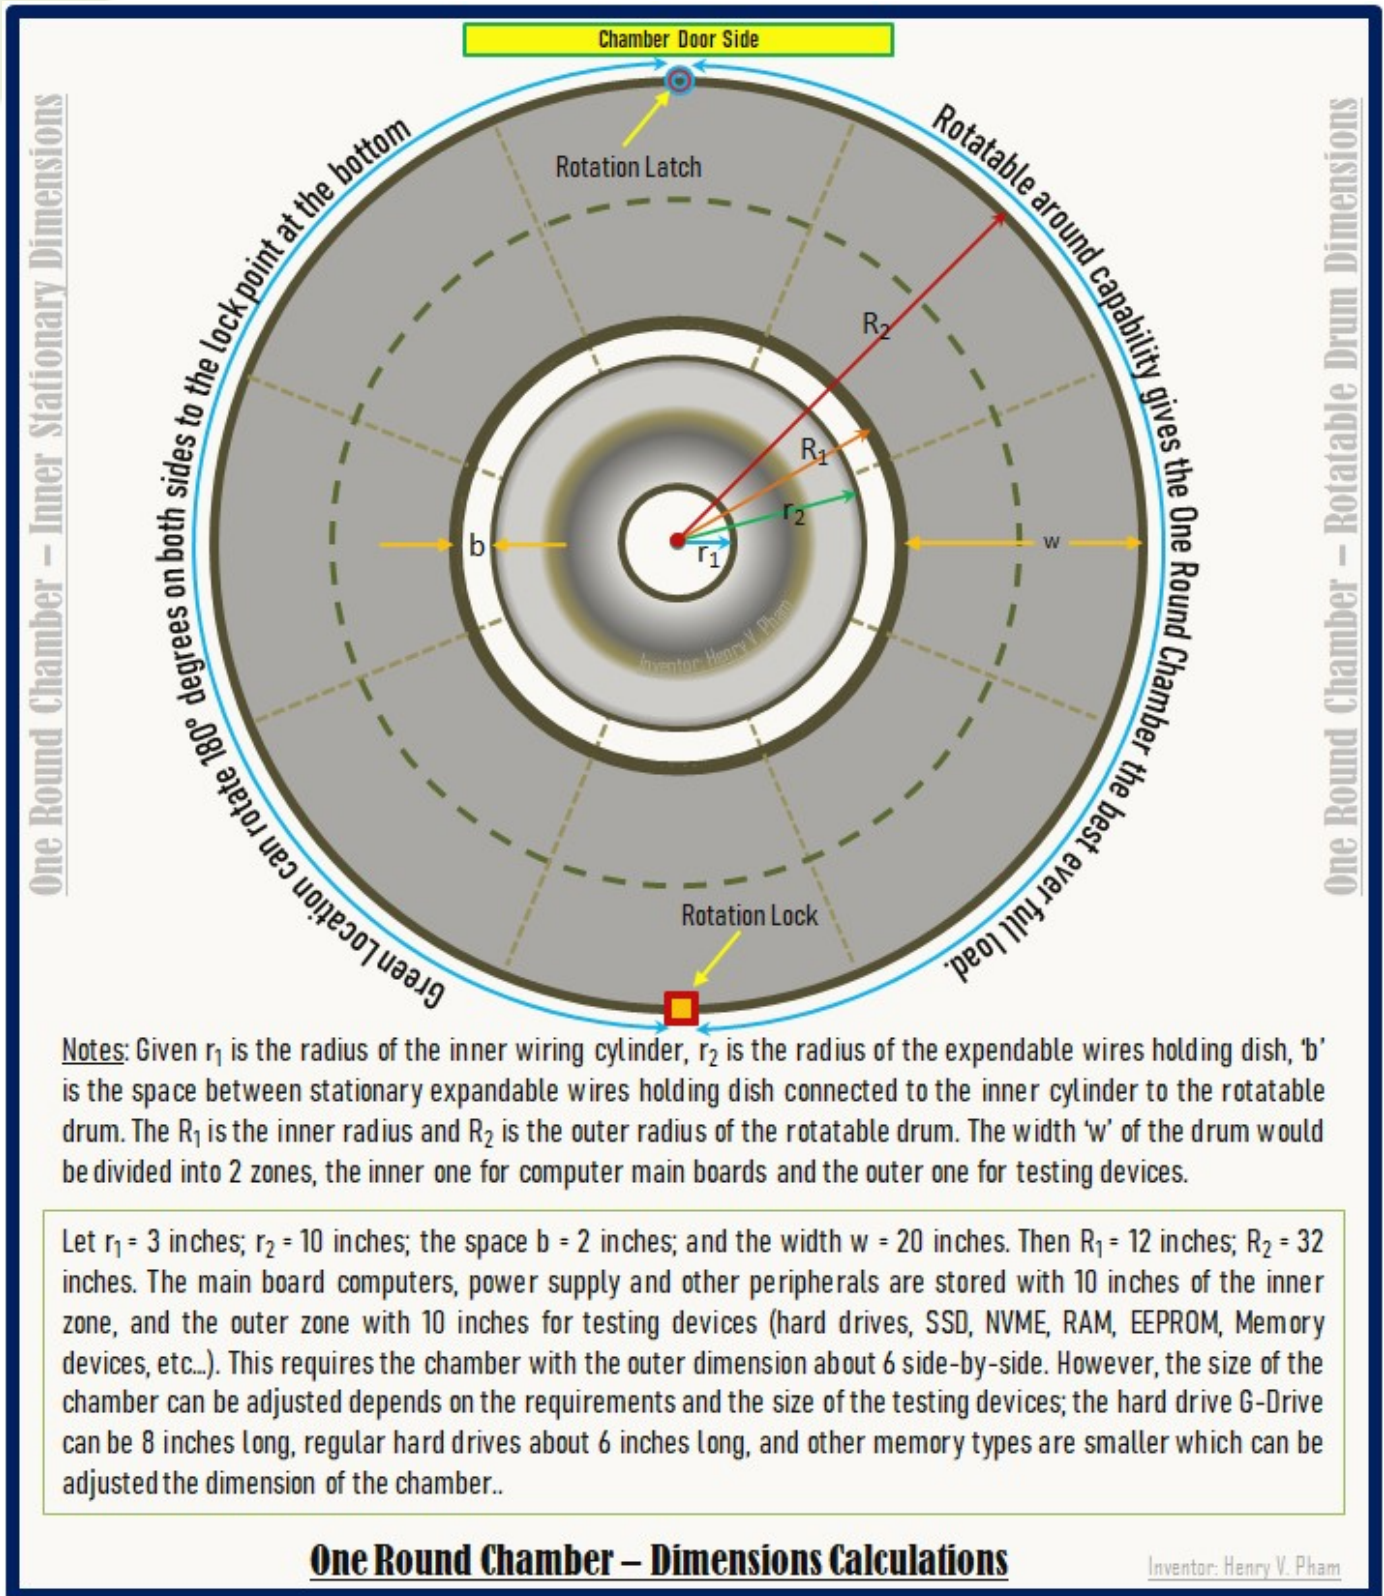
Chamber Rotator Drum & Stator Dimensions Calculations
